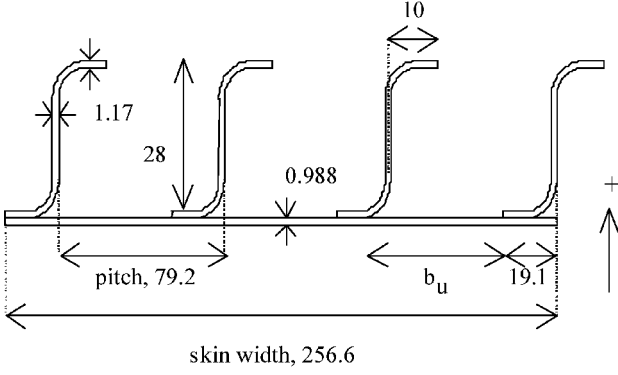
Cross section of the example panel showing the direction taken as positive for the imperfection; all dimensions are in millimeters, the unsupported skin width $b_u = 63.5$ mm, and the panel length l was 539 mm.
